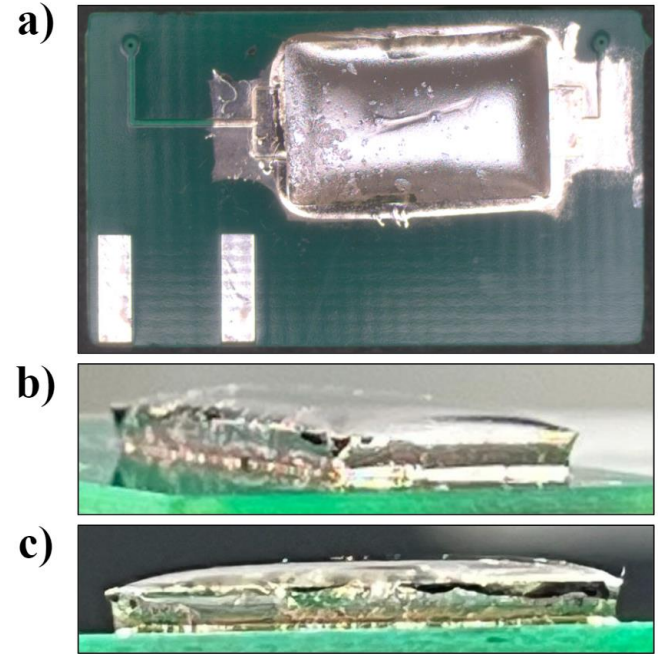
(a) Top view, (b) left side view, and (c) right side view of a silver coated cuboid test structure.
